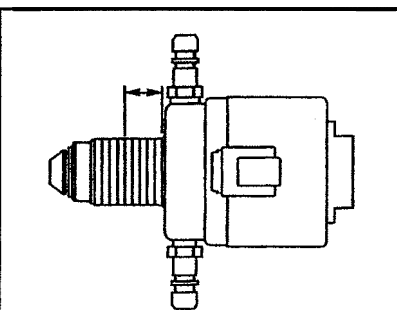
Apply high-strength threadlock to the thread closest to the injector
